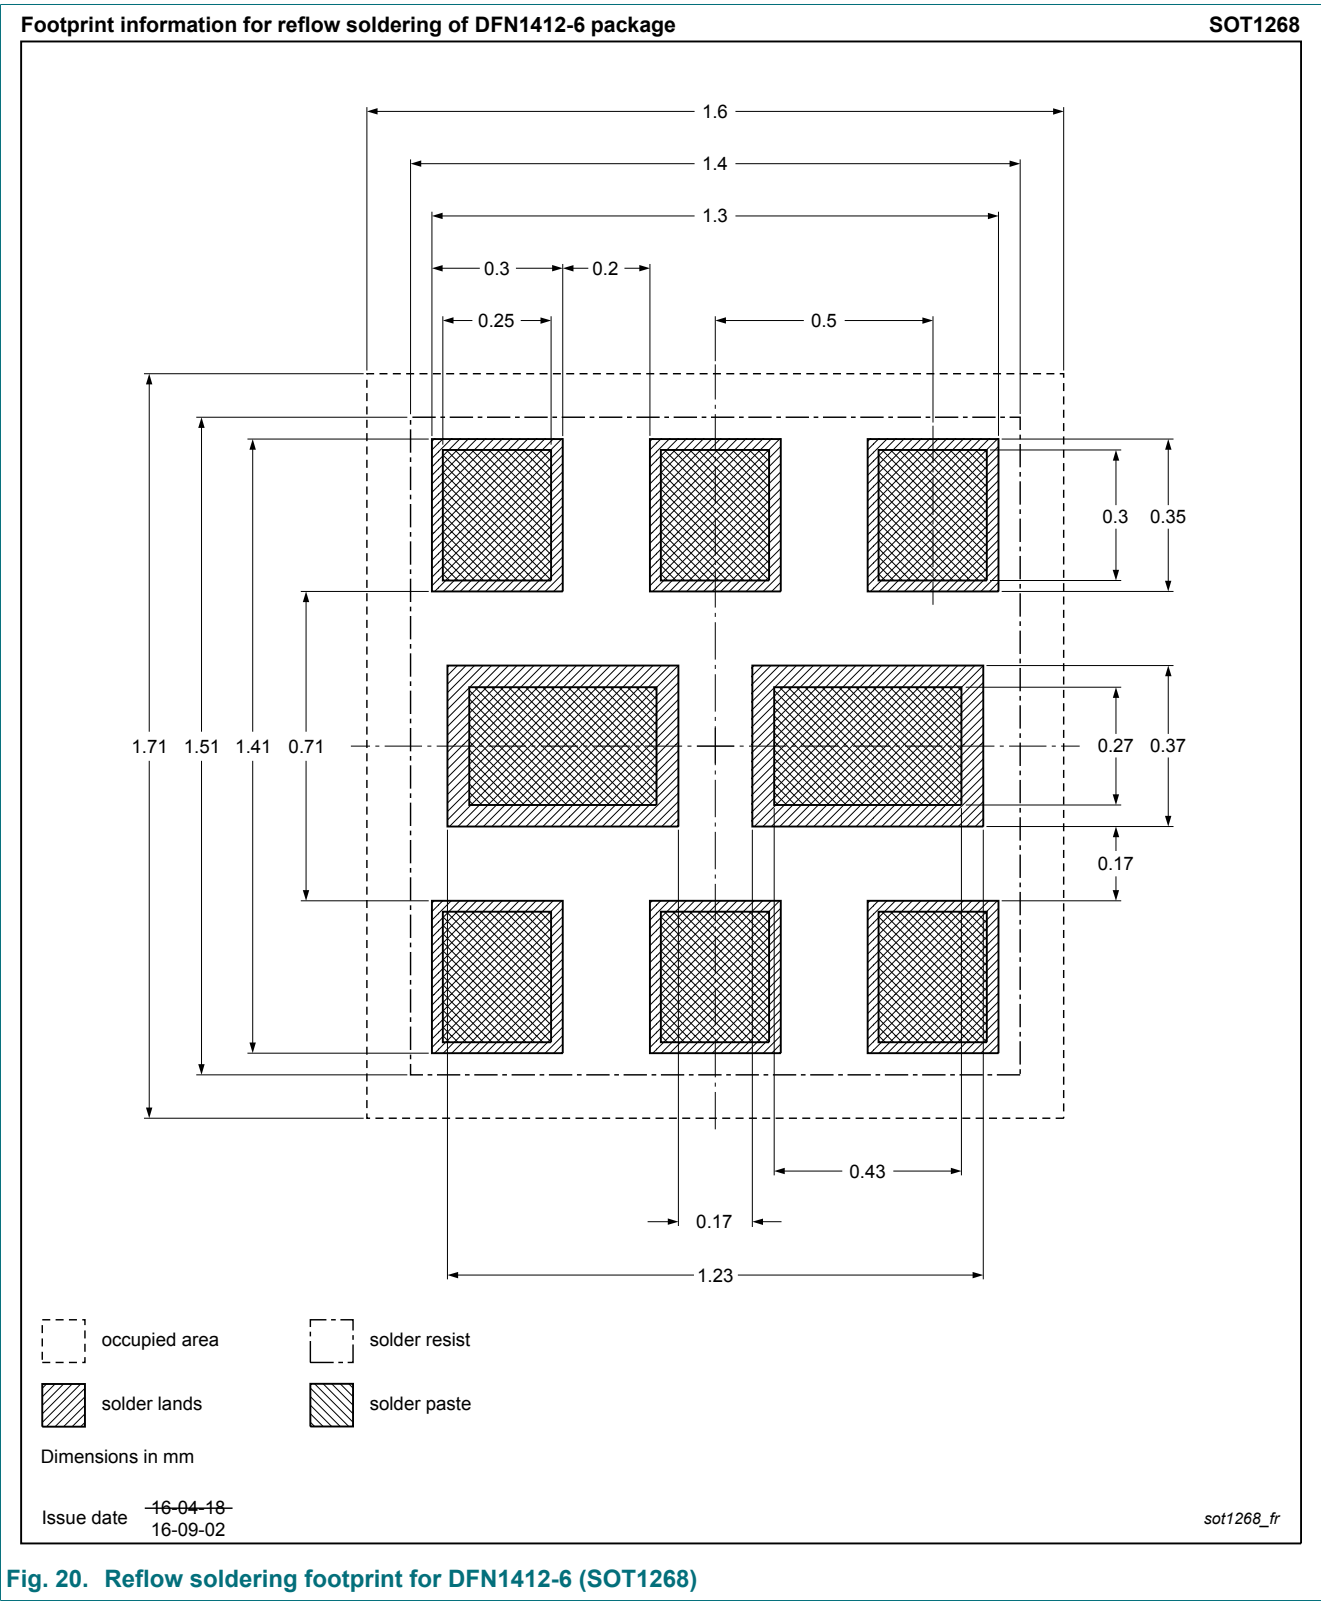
Reflow soldering footprint for DFN1412-6 (SOT1268)
